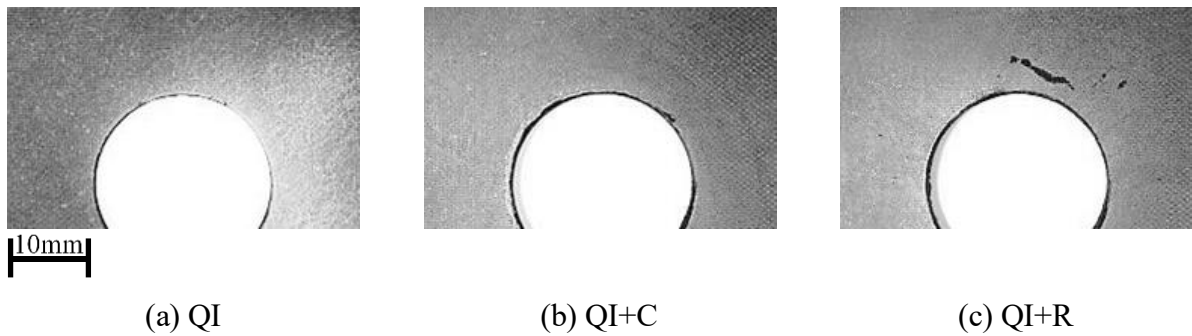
Macroscopic failure of the specimens at the initial bearing strength, S_{ini} ($e/d=3$)
